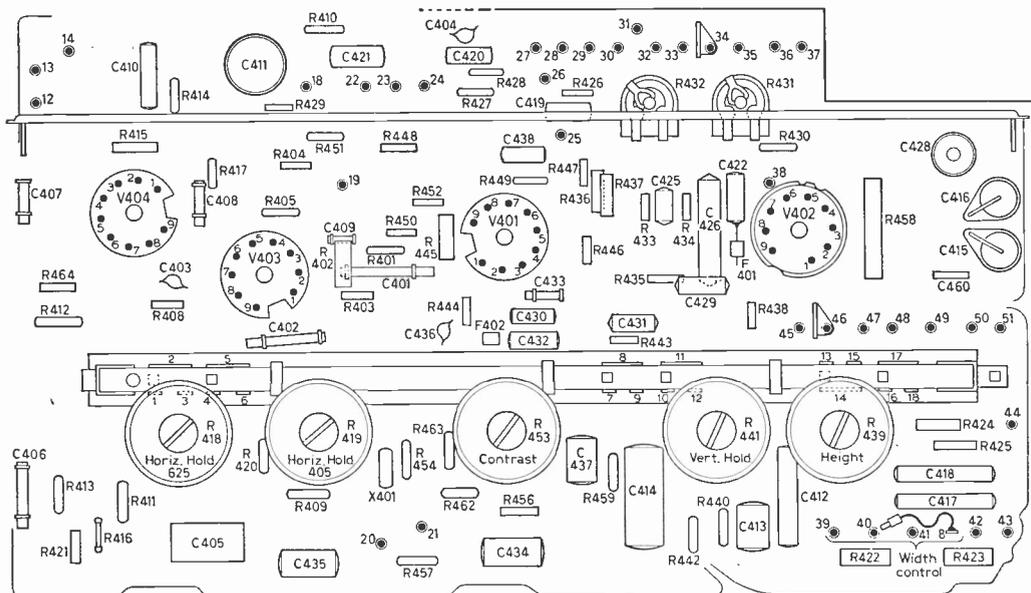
Layout of the timebase printed board, viewed from the component side.
